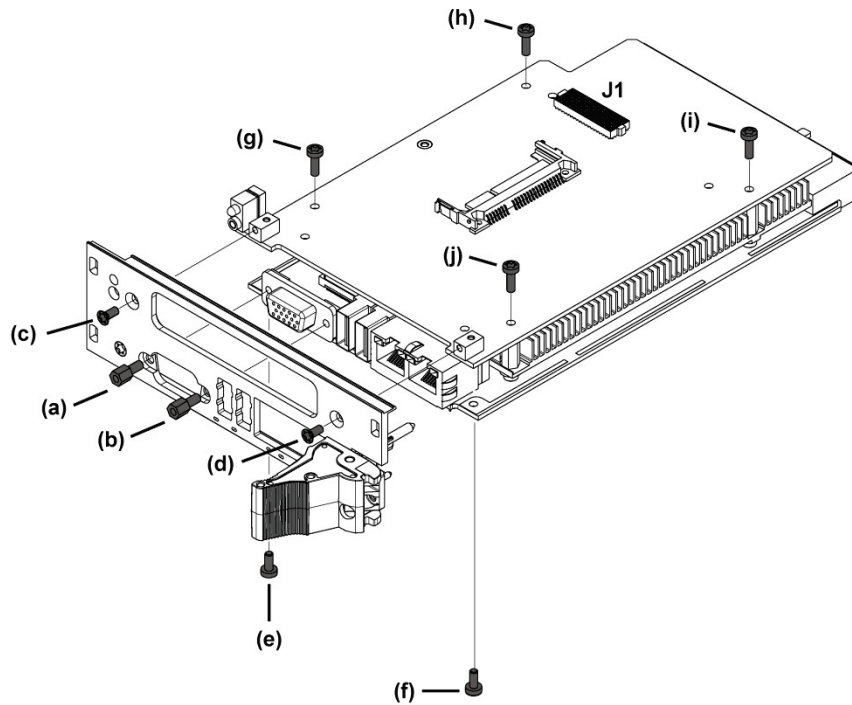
Screws Securing the XMC Module to the MMEXT-XMC02 Extension Module
